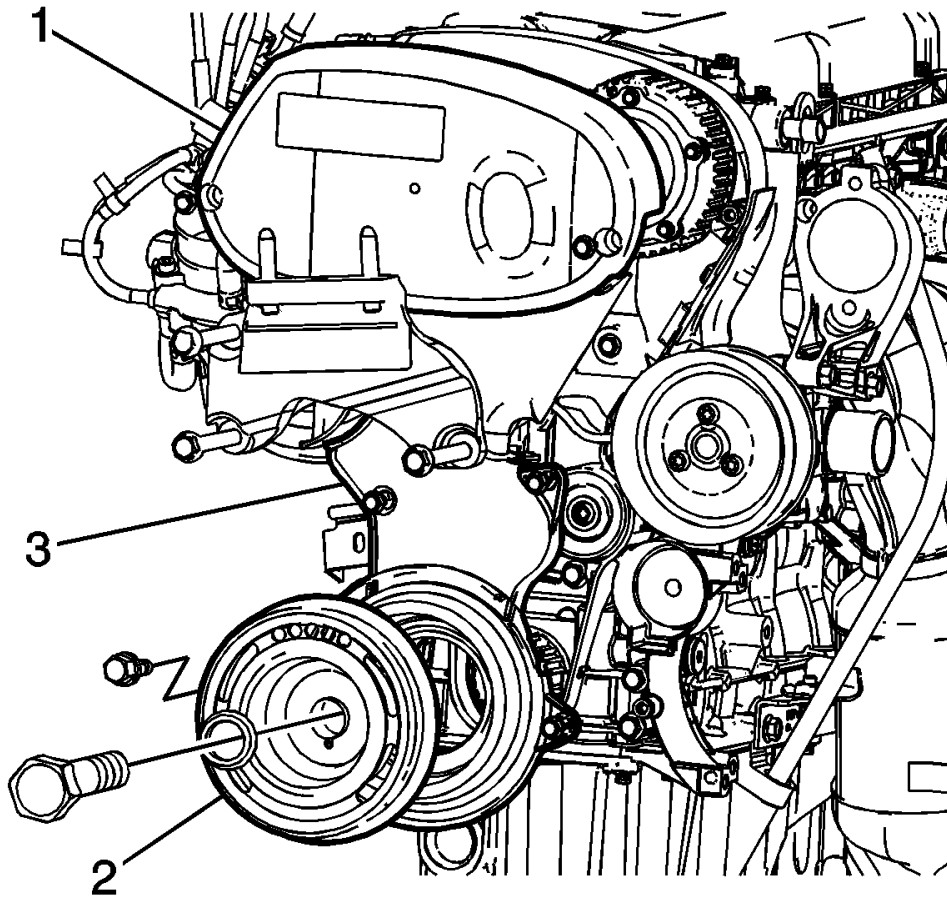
Crankshaft Pulley & Timing Belt Upper Cover
